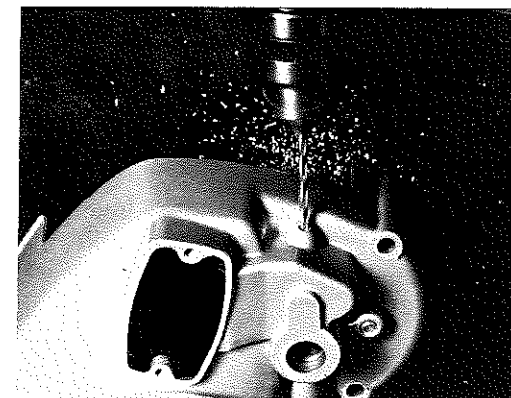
Method of drilling access hole in order to remove shifter pin.
